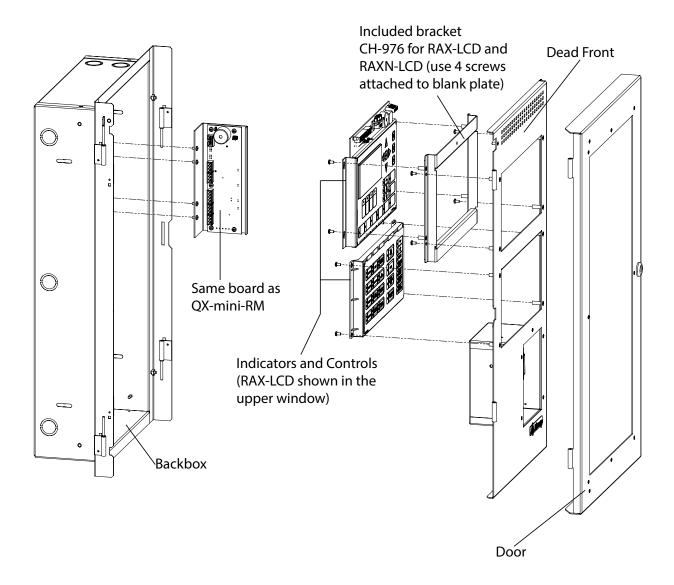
Exploded view of QX-mini-LOC showing mounting of RAX-LCD
